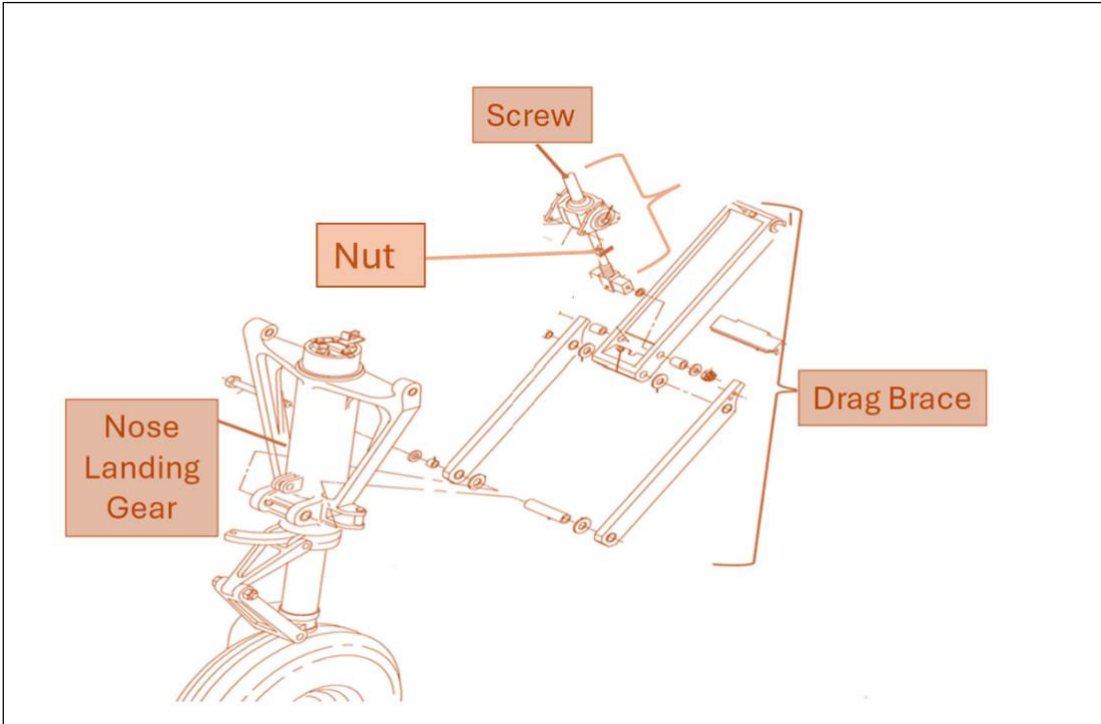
NLG Actuator Screw, Nut and Drag Brace.
